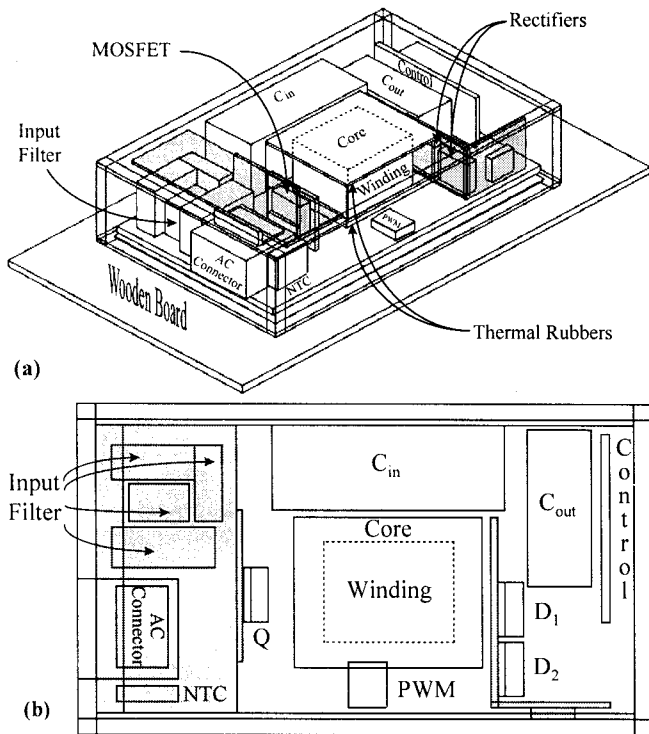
Mechanical design and placement of key components in packaging design: (a) 3-D view; (b) top view; (shaded areas are heatsinks.)
